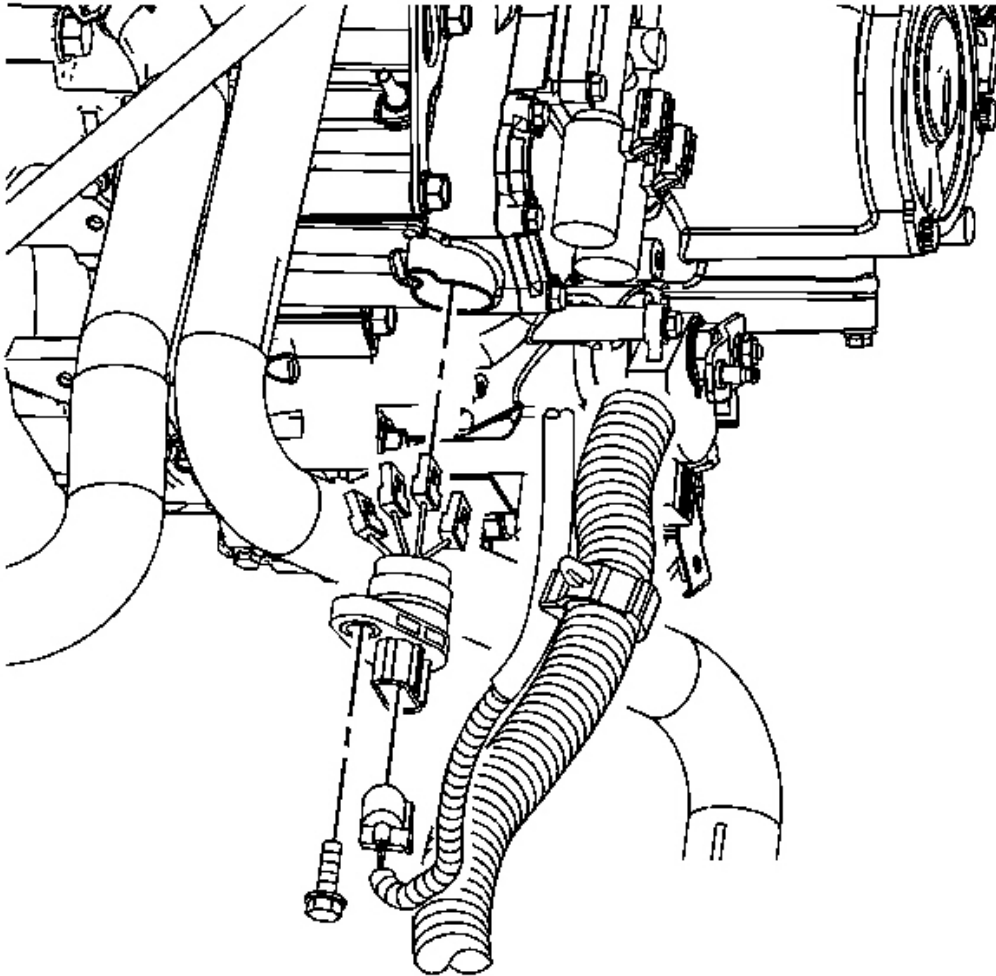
Shift Control Solenoid Valve Electrical Connectors, Transmission Wiring Harness & Bolt
